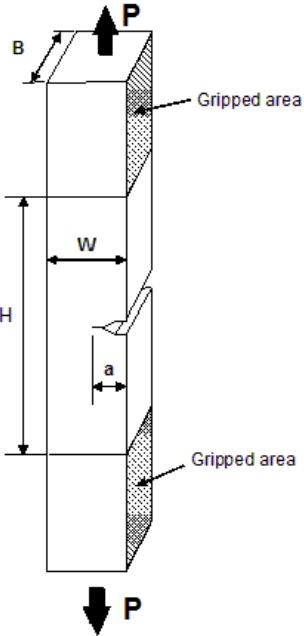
The clamped SENT (Single Edge Notched Tension) specimen
